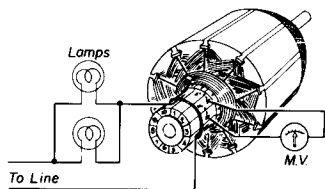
Testing an armature for shorted coils by using the bar-to-bar test. A shorted coil will be indicated by a low or zero reading on the meter.
